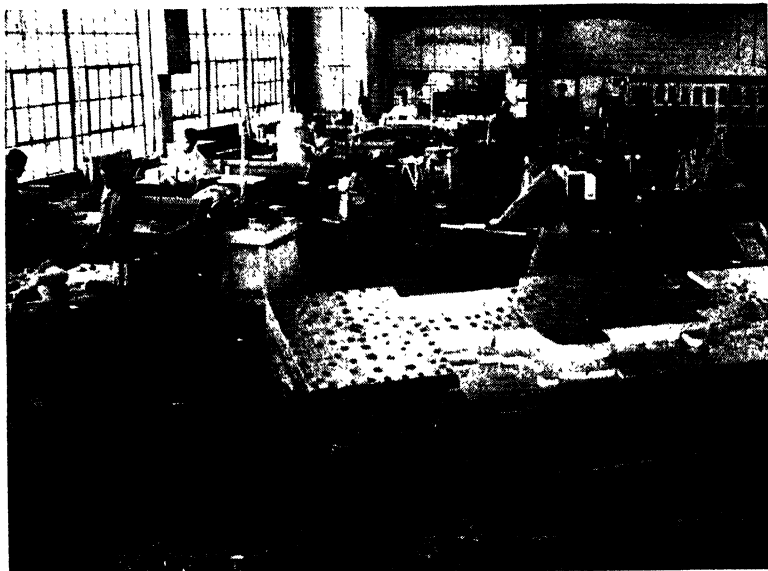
Apprentices making wooden patterns. These wooden patterns will be placed in special casting sand. After the sand has set, the pattern is removed and molten steel is poured into the cavity, thus forming the casting.
